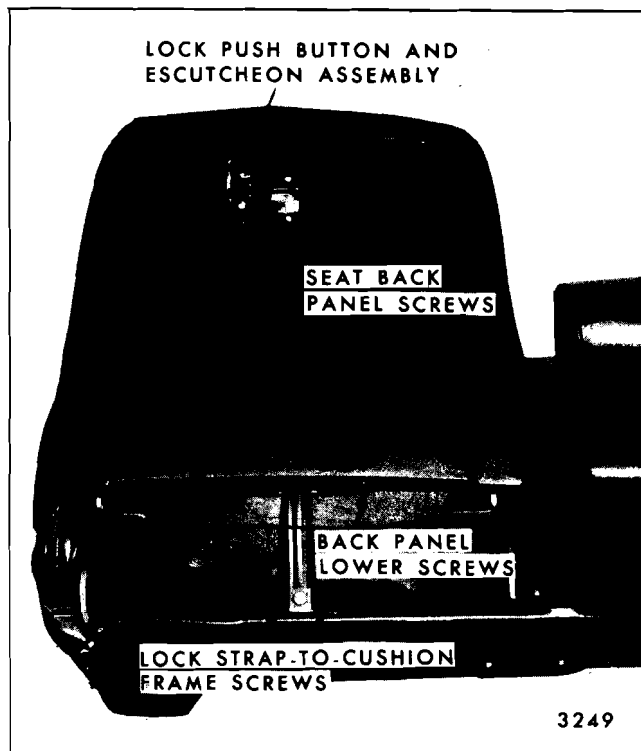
Strato Back Panel Removal - Strato Folding Seats (Except Reclining Seat)
